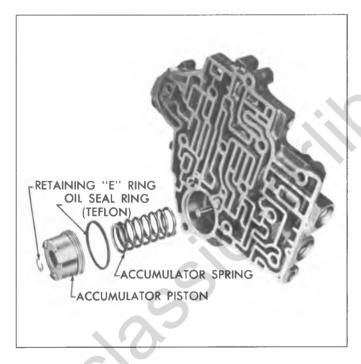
B—Front Accumulator Assembly · Exploded tap in place until flush with cast surface of the valve body.
